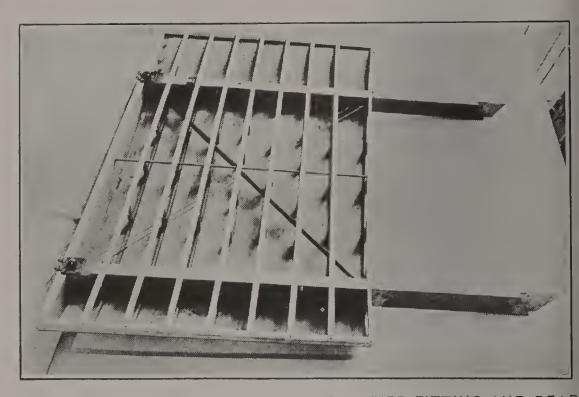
SIDEWALK PANEL REMOVED AFTER FITTING AND READ FOR UNDERSIDE COVERING. PORT PANEL TO BE MARKE "P" AND STARBOARD PANEL "S," WITH BOAT NUMBER FOLLOWING LETTER. TOP SURFACE OF THESE PANELS IS COVERE WITH VENEER.
